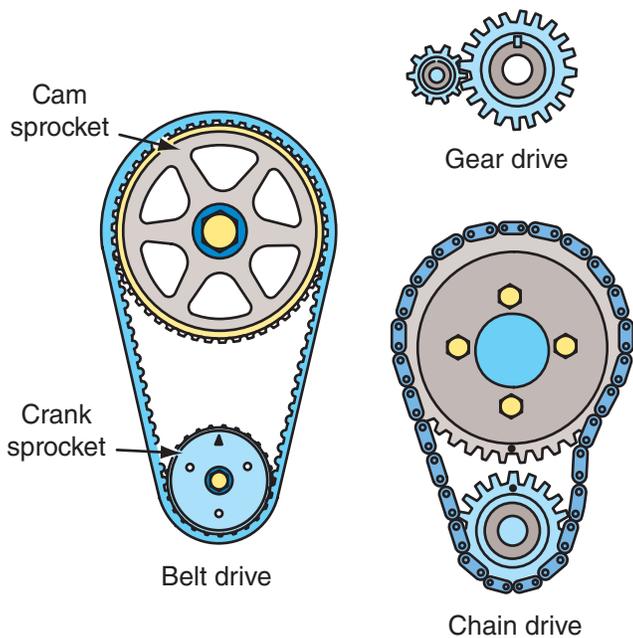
There are half as many teeth on the crank drive as there are on the cam drive.
